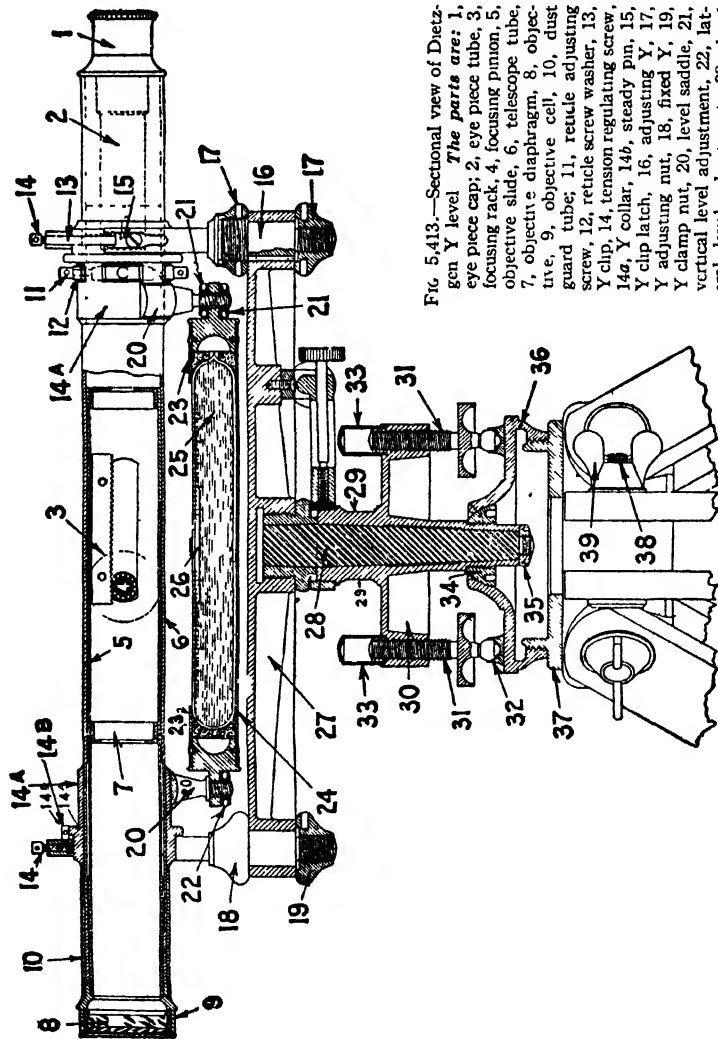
Sectional view of Dietzgen Y level. The parts are: 1, eye piece cap; 2, eye piece tube; 3, focusing rack; 4, focusing pinion; 5, objective slide; 6, telescope tube; 7, objective diaphragm; 8, objective; 9, objective cell; 10, dust guard tube; 11, reticle adjusting screw; 12, reticle screw washer; 13, Y clip; 14, tension regulating screw; 15, Y collar; 16, steady pin; 17, Y clip latch; 18, adjusting Y; 19, Y adjusting nut; 20, fixed Y; 21, Y clamp nut; 22, level saddle; 23, vertical level adjustment; 24, lateral level adjustment; 25, level ends; 26, level tubing; 27, leveling screw; 28, leveling screw plate; 29, tripod head; 30, tripod bolt; 31, tripod nut; 32, tripod nut; 33, tripod nut; 34, tripod nut; 35, tripod nut; 36, tripod nut; 37, tripod nut; 38, tripod nut; 39, tripod nut.
